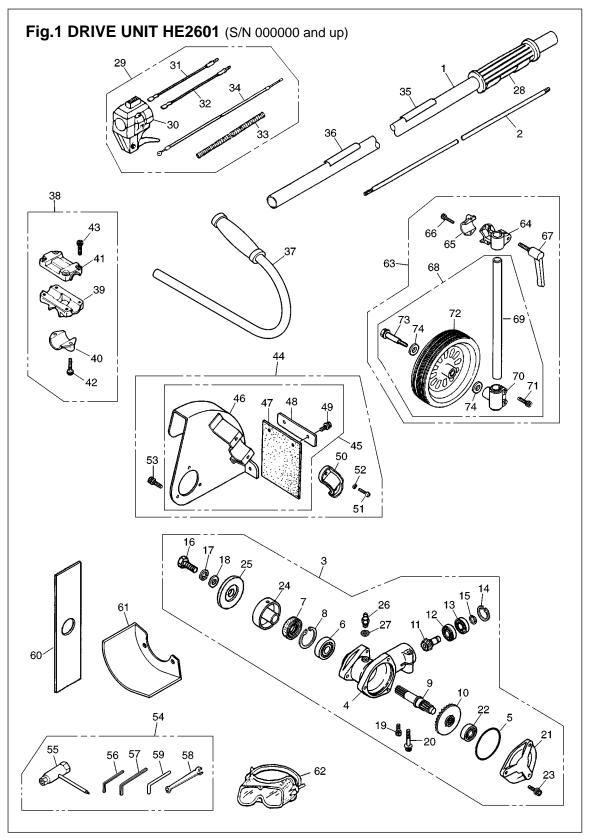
DRIVE UNIT HE2601 (S/N 000000 and up)
